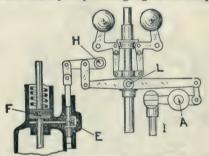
Sectional view of governor of the Parsons-Westinghouse turbine.
